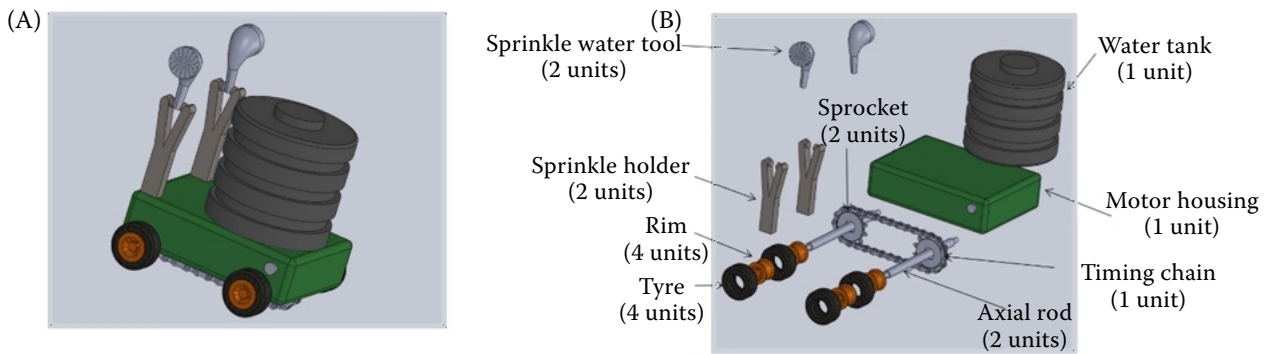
View of (A) assembled parts and (B) exploded view of the Auto Sprinkler Rover using SolidWorks software
